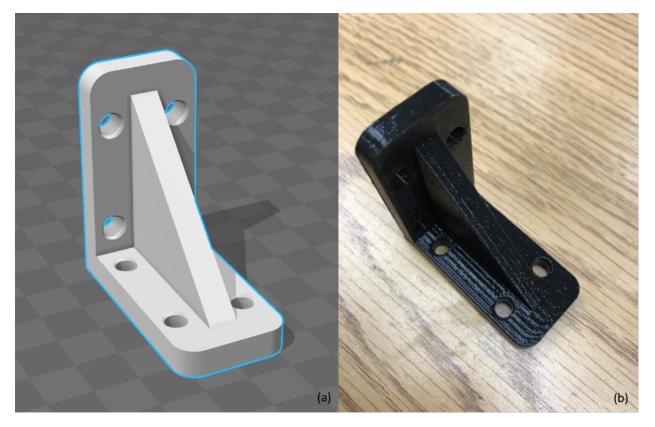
Figure 2. 3-D printed bar holder: (a) Onshape model of the bar holder; (b) 3-D printed sample holder.
